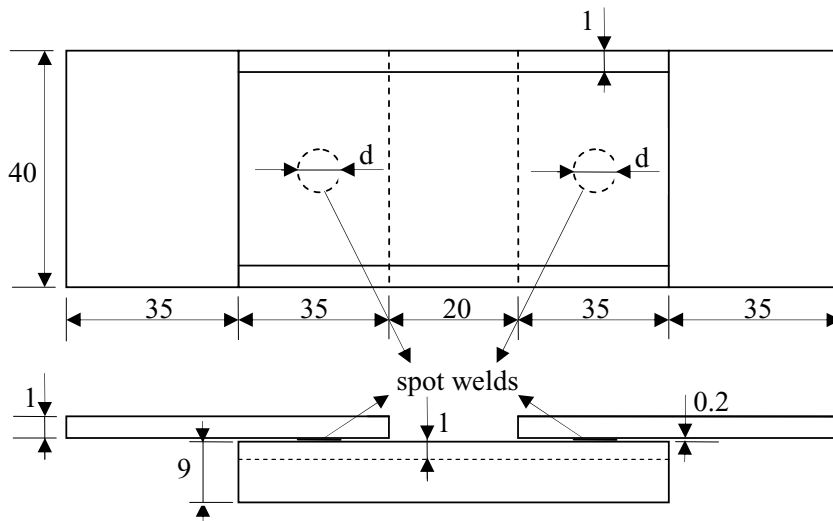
Geometry of the modified tensile shear (MTS) specimens (bottom and side views).
